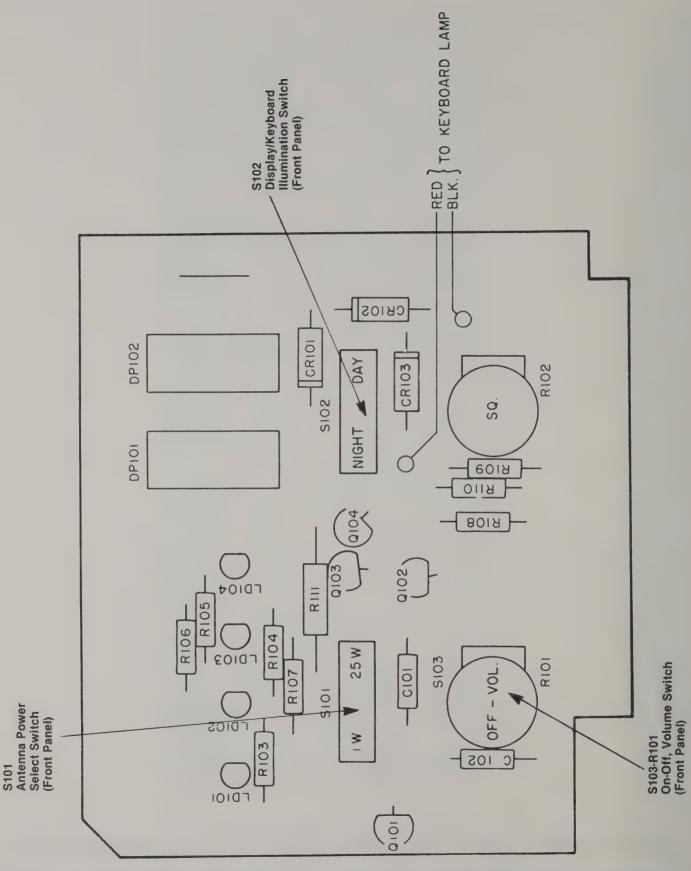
A. Parts Placement, Control PCB Assembly; Top View.
